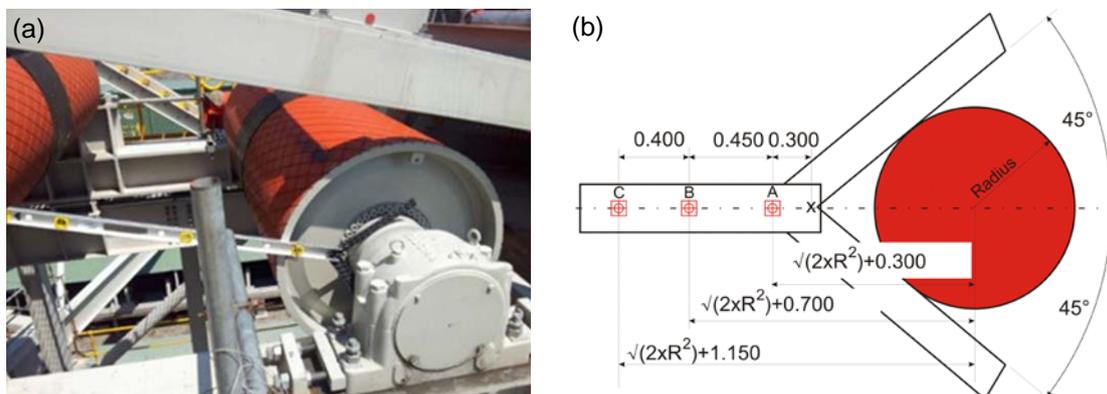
(a) Roller tool in use, and (b) roller tool schematic.
